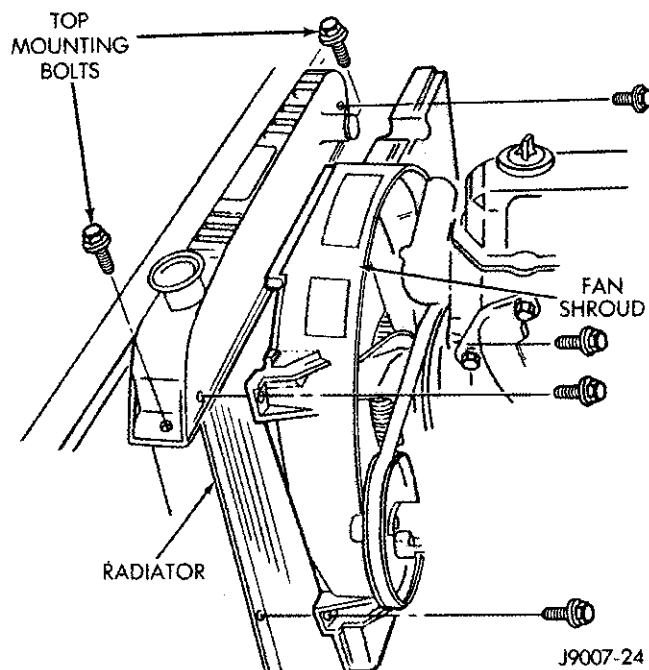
Shroud Remove/Install MJ and XJ Vehicles—2.5L
